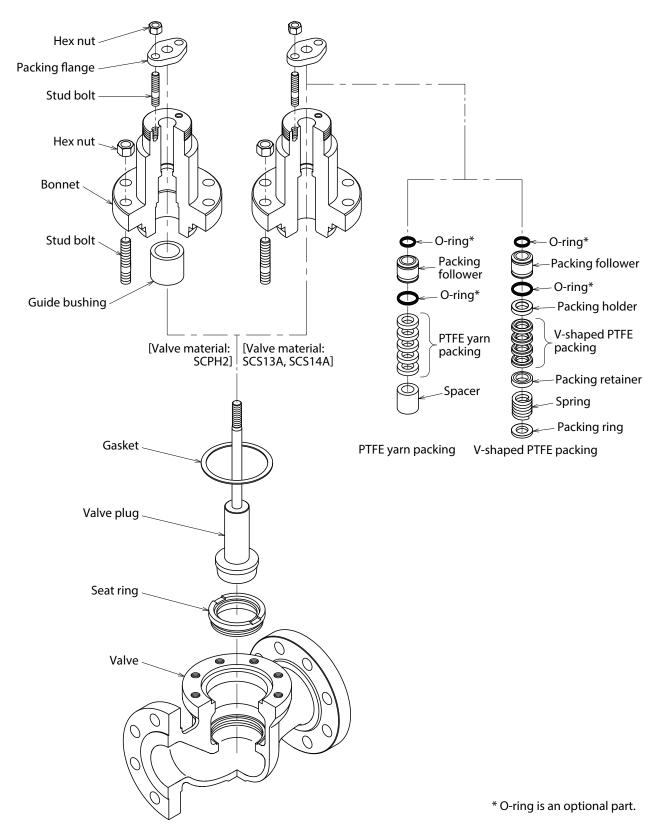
Valve body structure (connection diameter: 21/2 to 4 inches)
